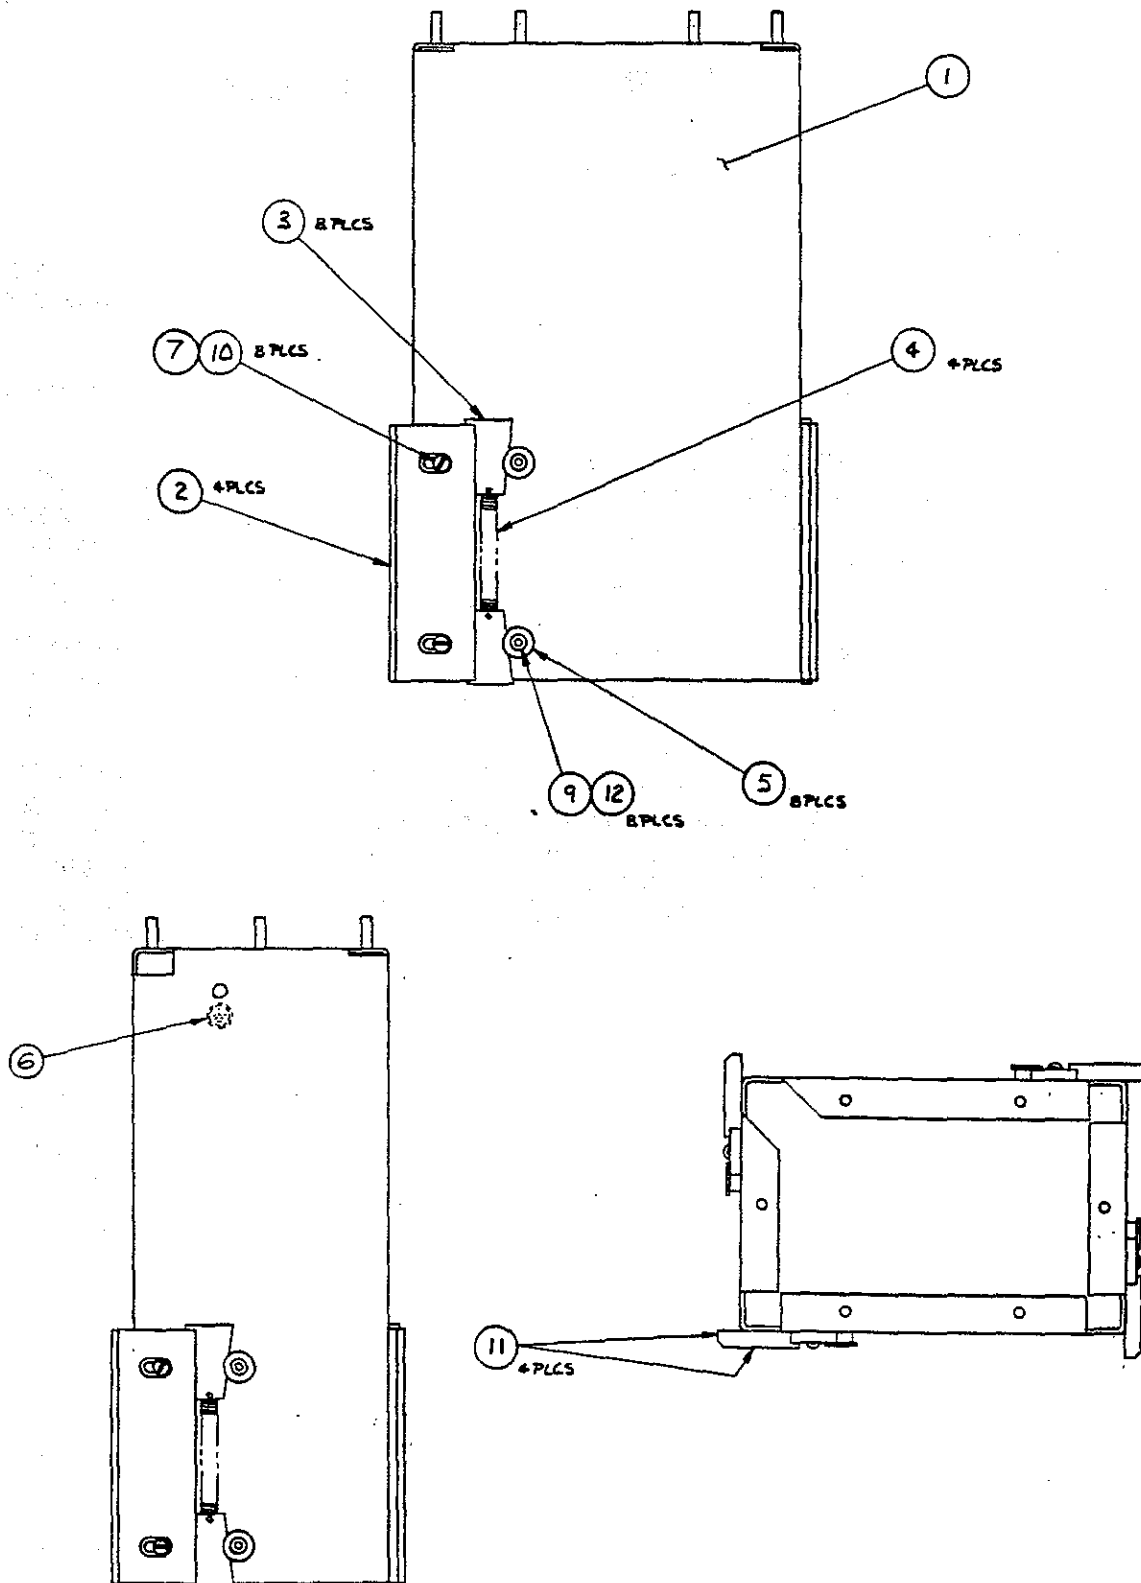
PARTS LOCATION DIAGRAM, INNER COLUMN ASSEMBLY
